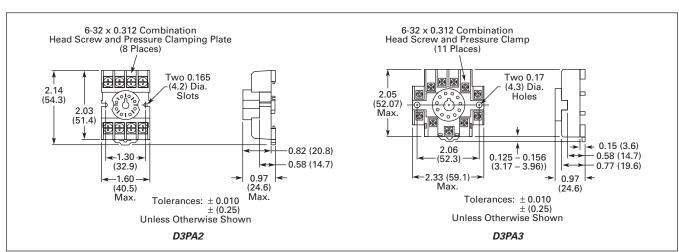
D3PA2 and D3PA3 Sockets — Approximate Dimensions in Inches (mm)
